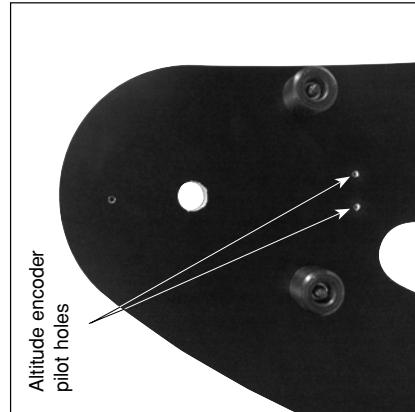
The two pilot holes used to mount the altitude encoder assembly are located on the interior surface of the right side panel of the base.
